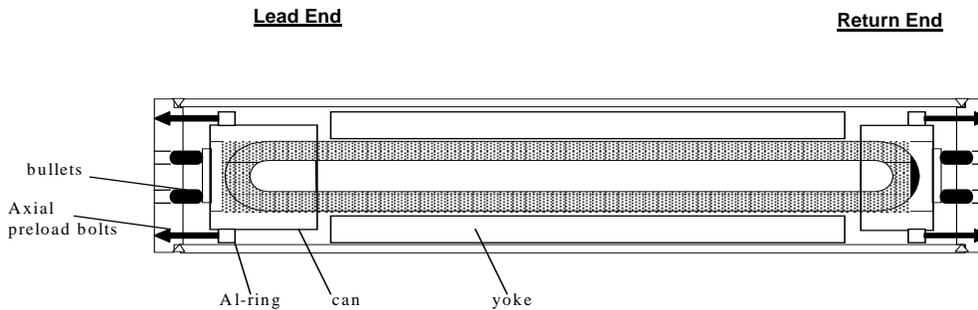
Axial Support of the Cold Mass Assembly
